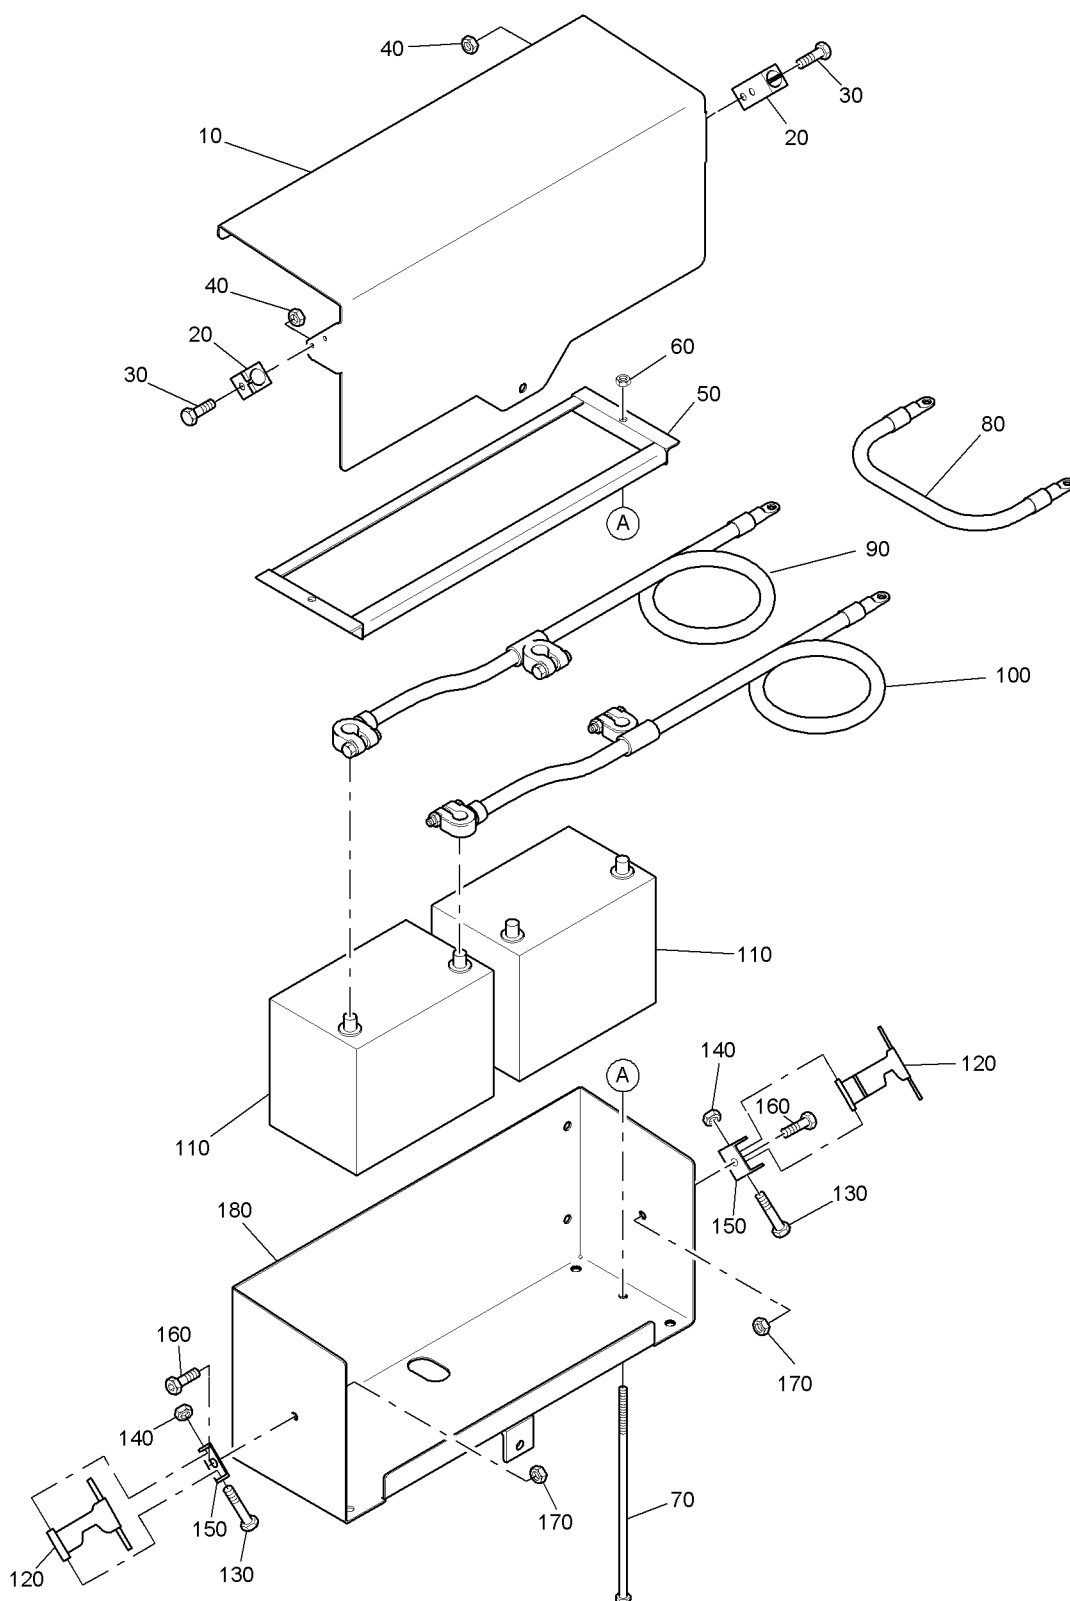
BATTERY BOX AND TOOL BOX ASSEMBLIES (SHEET 1 OF 2)
